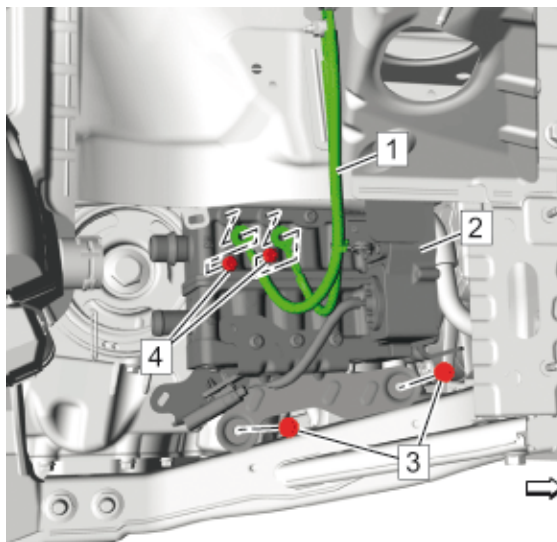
Heater Coolant Heater Bracket Assembly, Bolts And Wiring Harness
